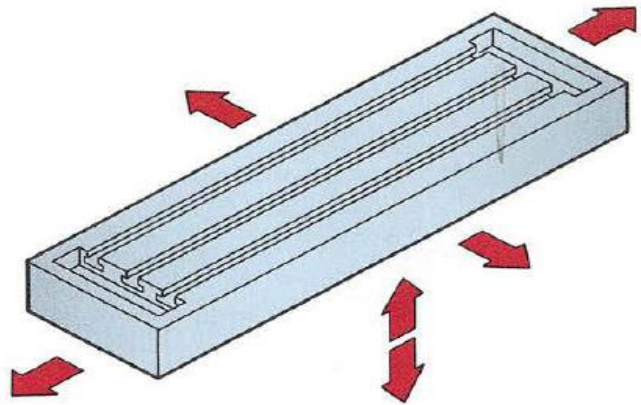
Plain mil ling horizontal machine Figure 3.4. Plain horizontal milling machine.
